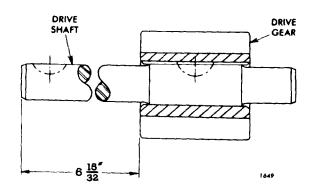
E-8. Oil Pump Drive Shaft and Gear Assembly
